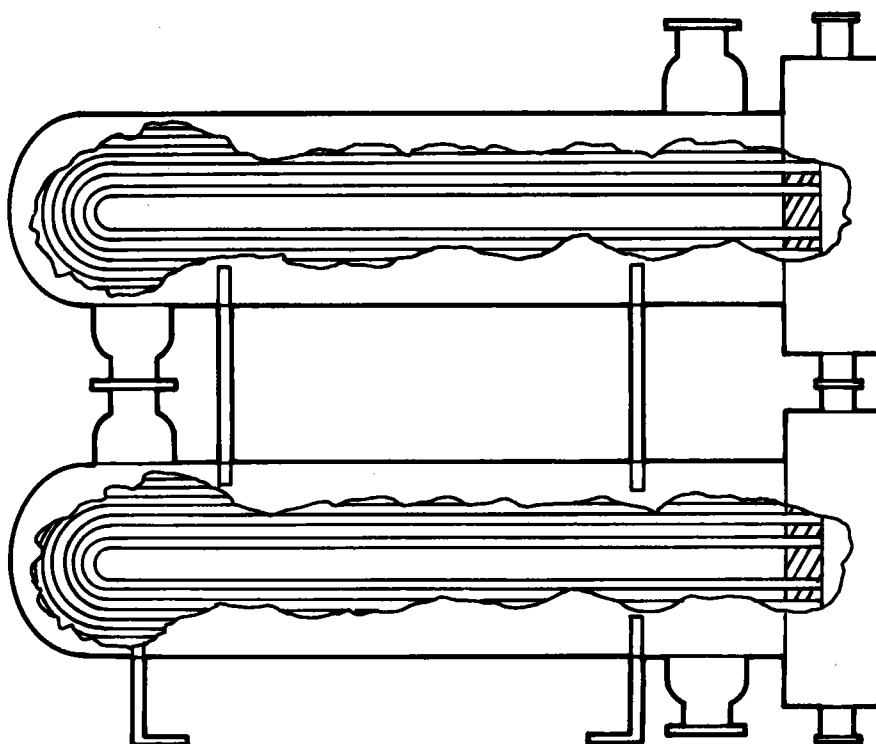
Two Single-Pass, U-Tube Heat Exchangers in Series, With Removable Tube Bundles
